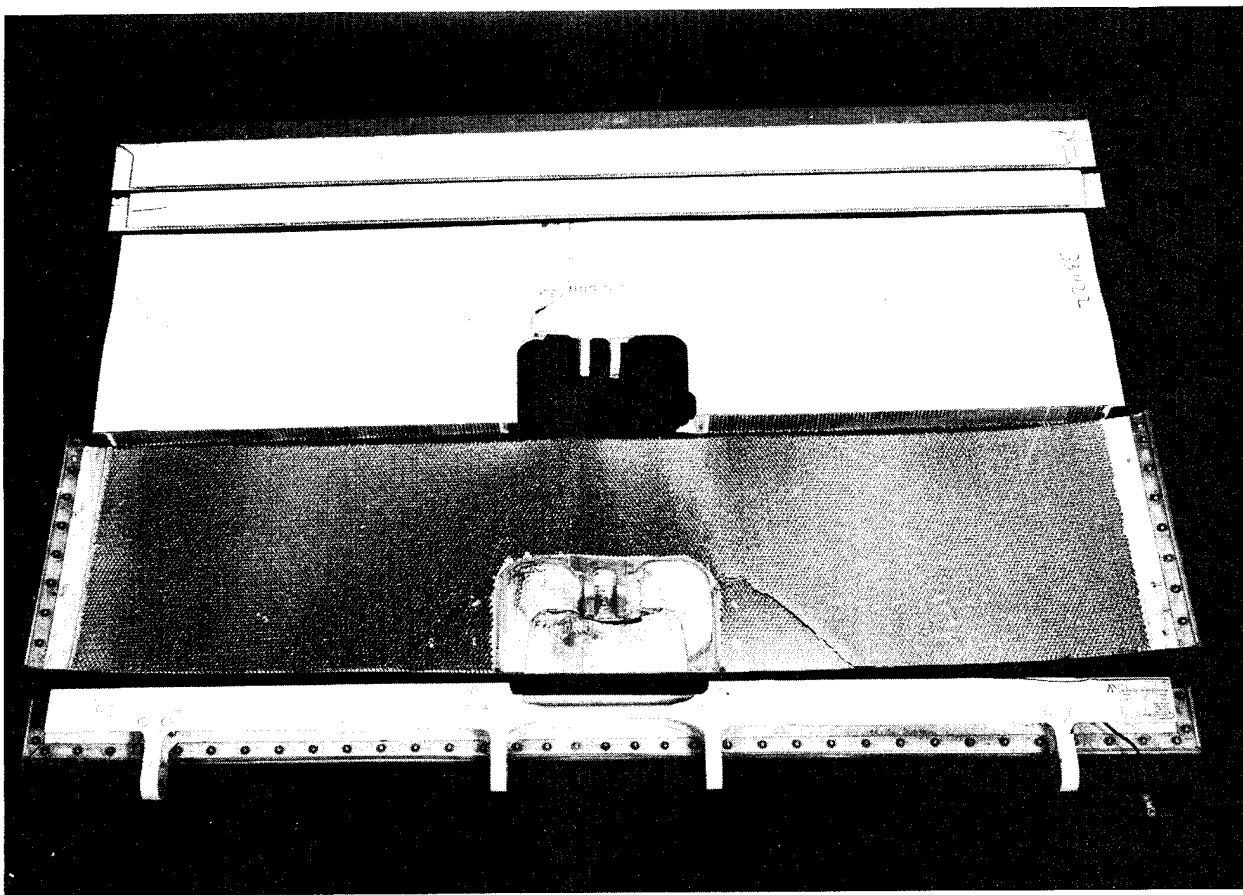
Dissection of S/N 0054 for Corrosion Inspection
